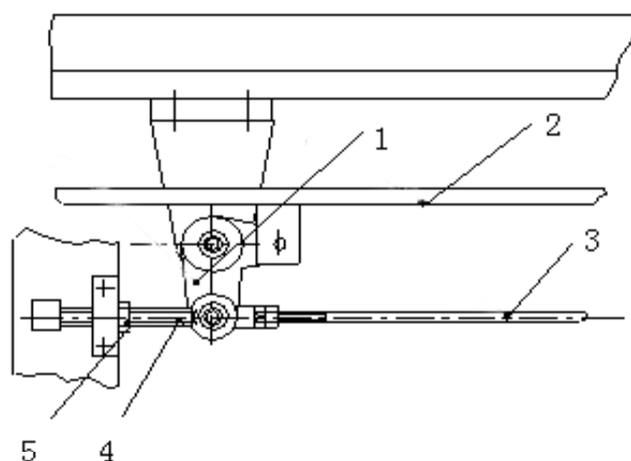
Adjusting Milling Cutter Height and Groove Depth
